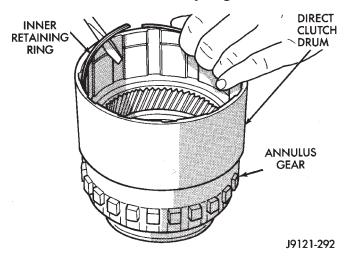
Removing Clutch Drum Inner Retaining Ring
